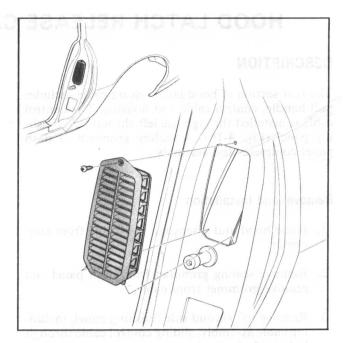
Pressure Relief Valve - "F" Styles ("H-11,27, 77" Styles Similar)
